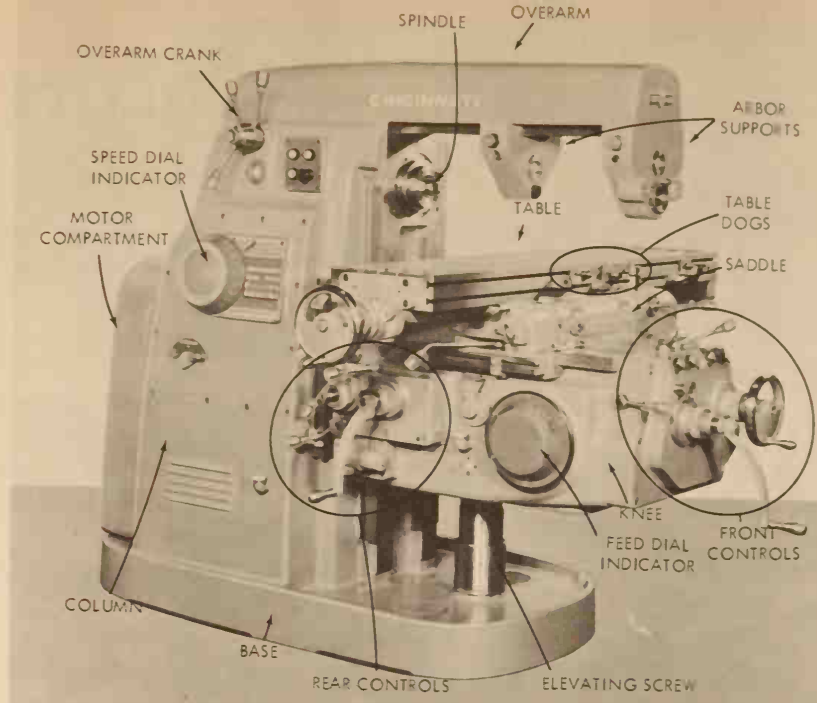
Horizontal milling machine. (Cincinnati Milling Machine Co.)
